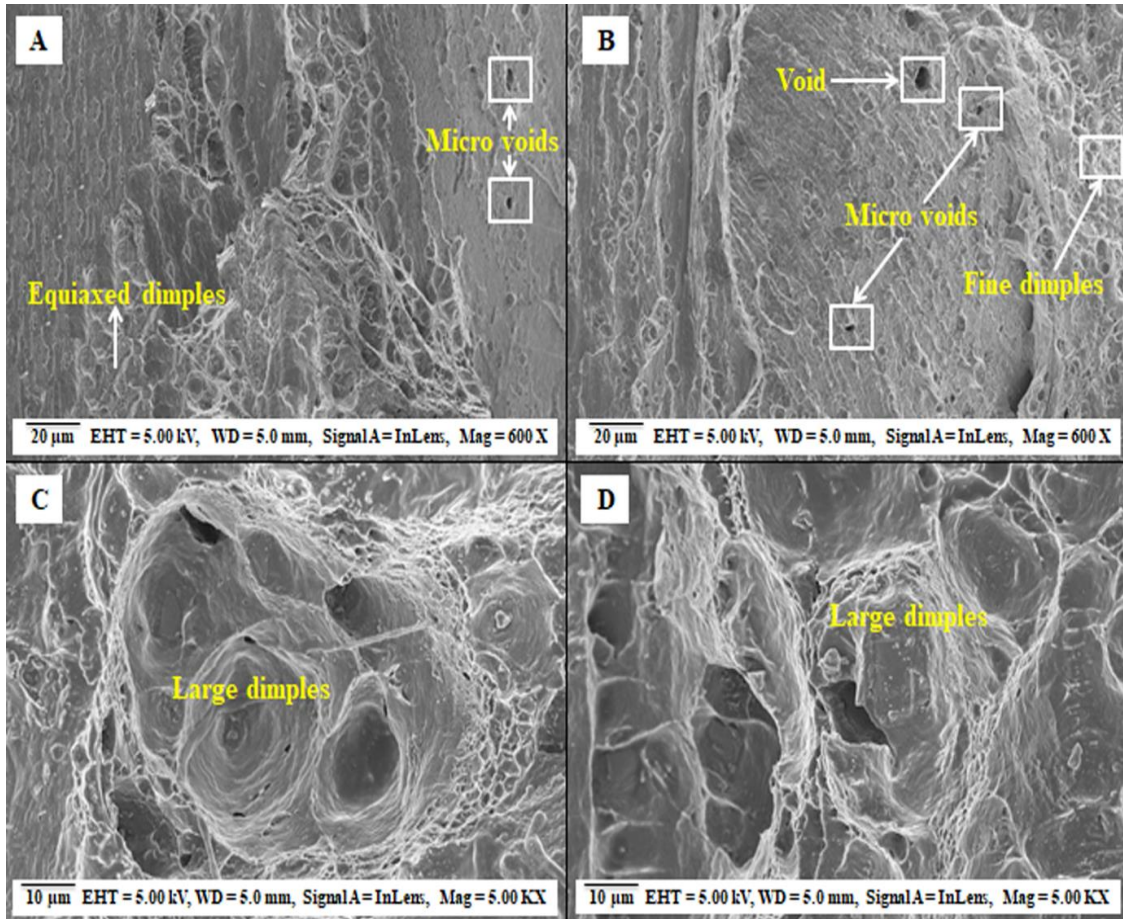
Fractured surface of the tensile tested specimens under SEM for welds B2 and C3 given in Table 5.1.
